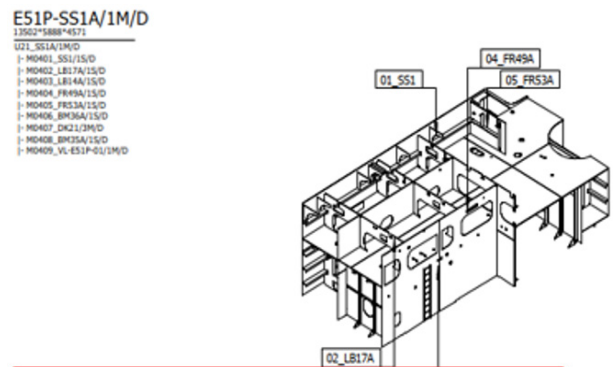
Sample: Grinding symbol in Assembly Drawing
